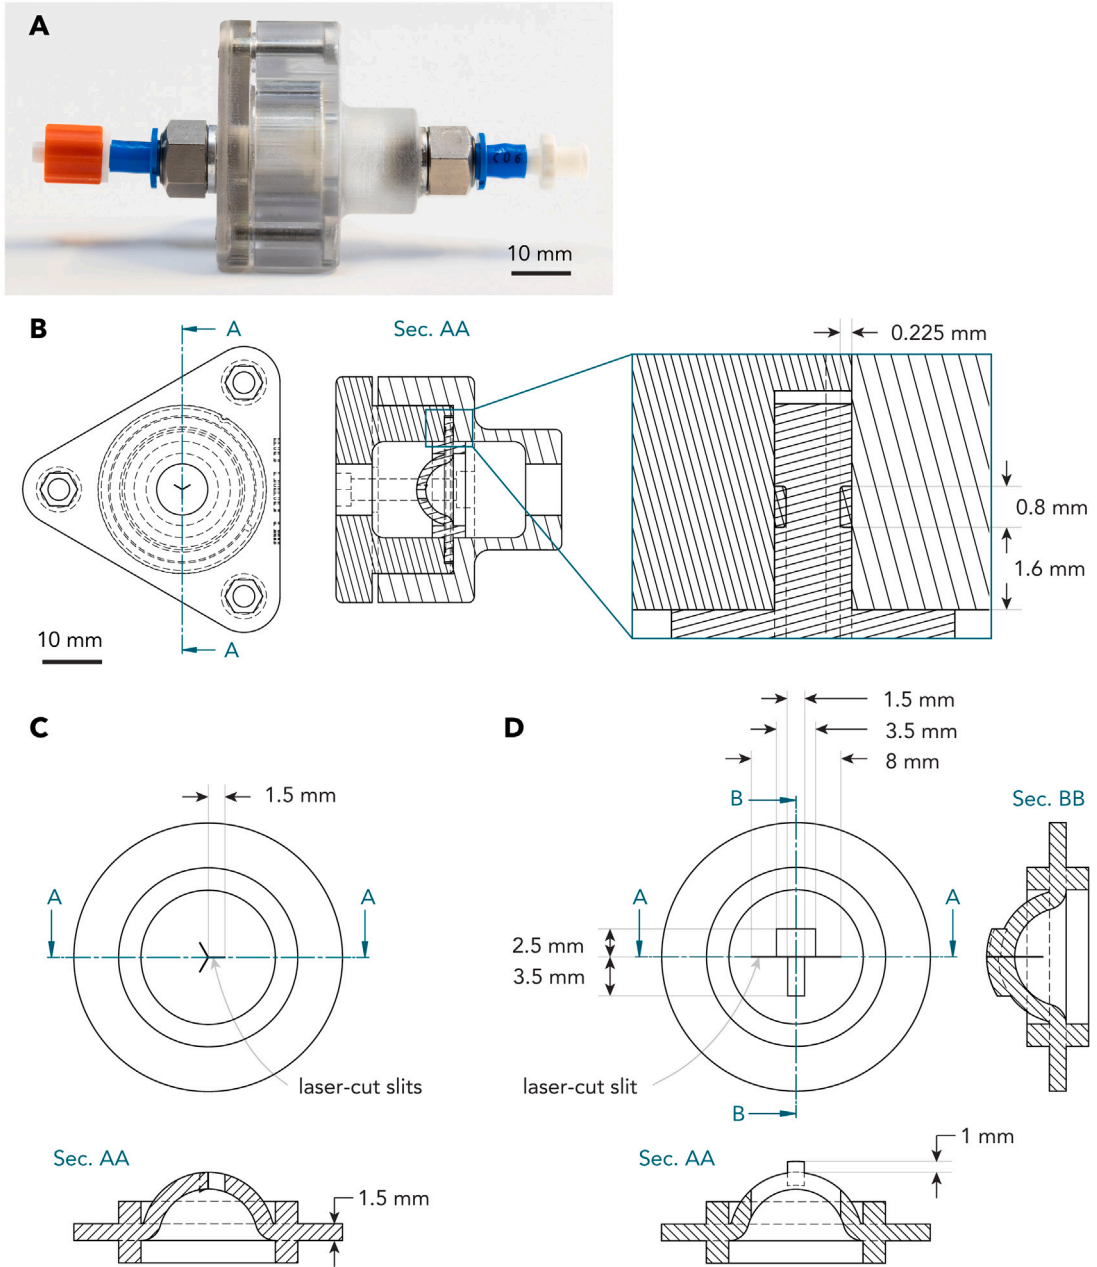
Valve and holder designs. (A) Assembled valve holder. (B) Valve holder design. (C) Original valve design (uniformly scaled up by a factor two with respect to the design used in our previous work (Van Laake et al., 2022)). (D) Modified valve design.
